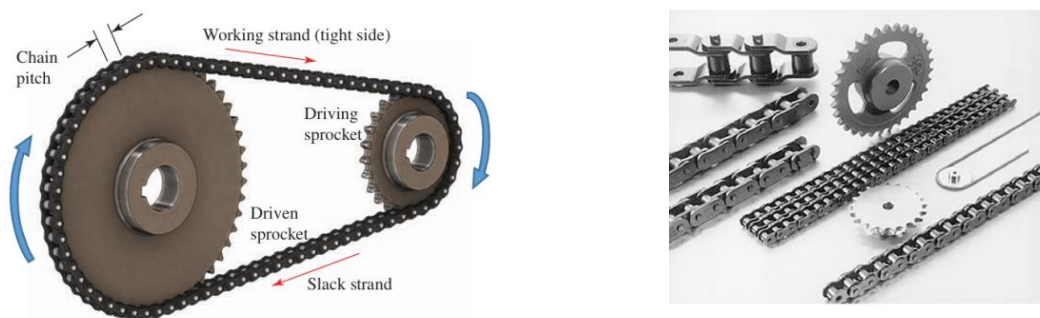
1: Chain and toothed wheel (sprocket)
